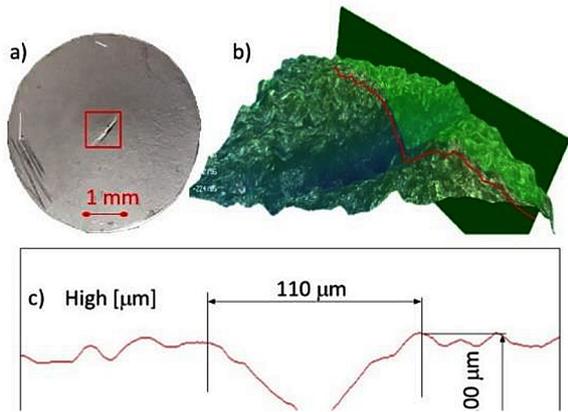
Sheet metal crack characteristics: (a) surface crack, (b) 3D crack identification, (c) crack measurement profile
